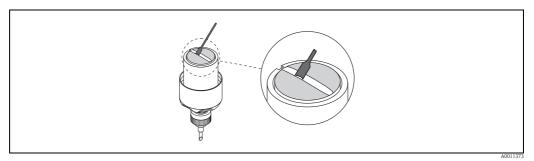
Coating the contact surfaces of the sensor with coupling fluid
